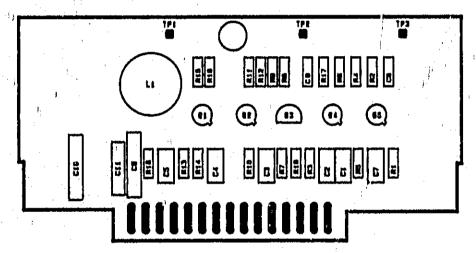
A7 Second Limiter Assembly Component Identification (CHANGE 6)
